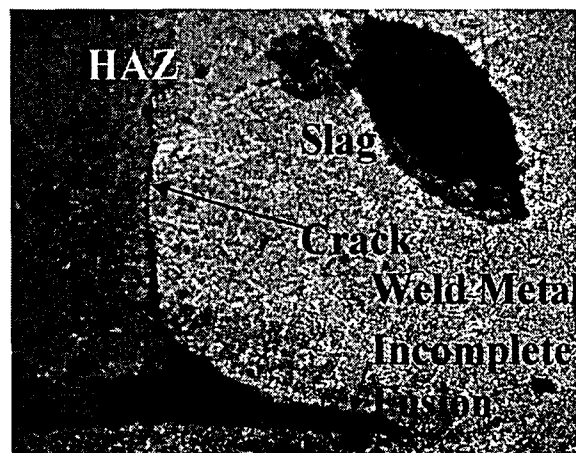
Vertical Crack, Non-fused Root- Specimen T-5, Section A
